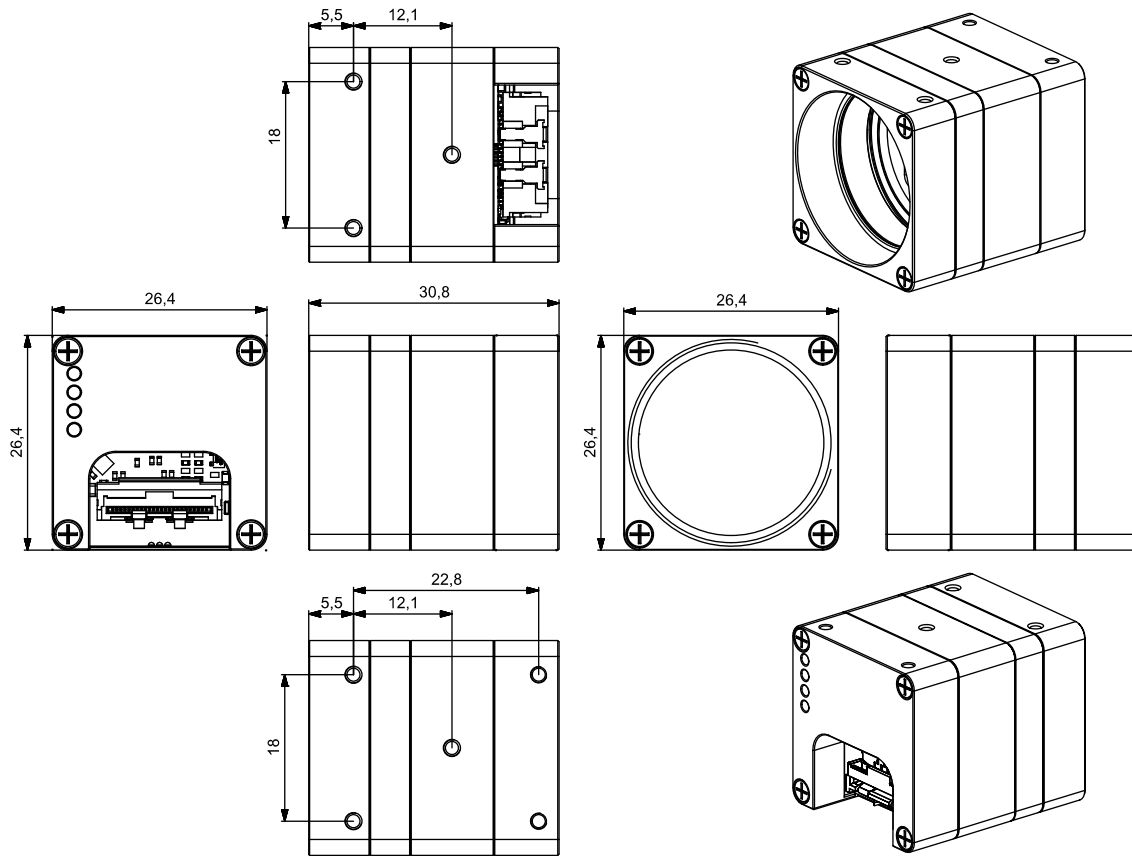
Dimensional drawing of MX031/050xG-SY-X2G2-FV (C-mount (with C-mount module B))
